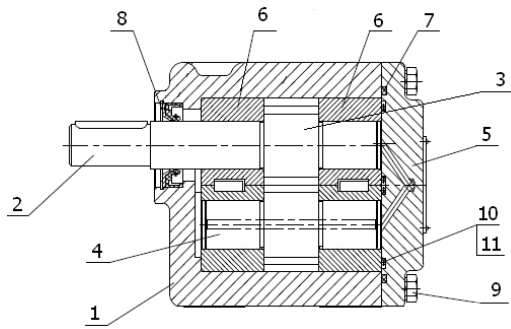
Gear pump PZ type: 1-pump housing, 2-drive shaft, 3-drive gear, 4-idler gear, 5-cover, 6-plain bearing, 7,10,11-sealing rings, 8-shaft sealing ring, 9-screw
